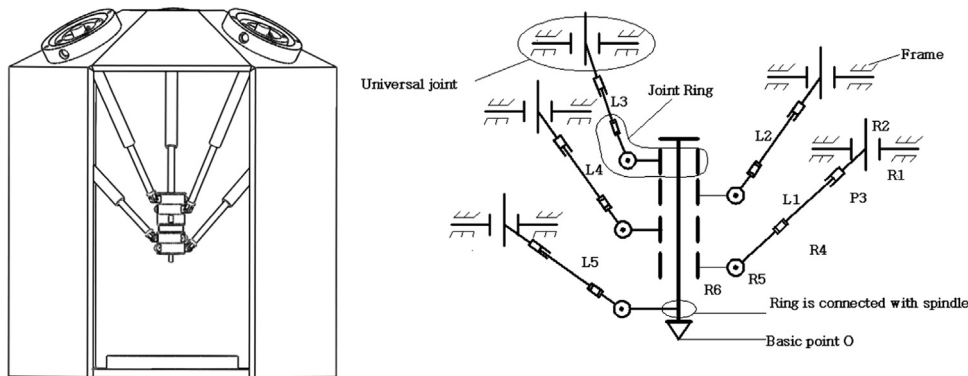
The structure and mechanical arrangement of a 5-DOF parallel machine with swivel hinges.
